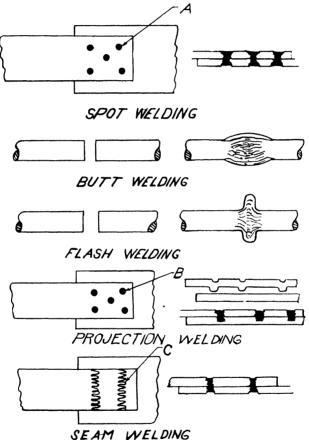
Types of resistance welding: A. Spot welds, B. Projections, C. Track of the roller
